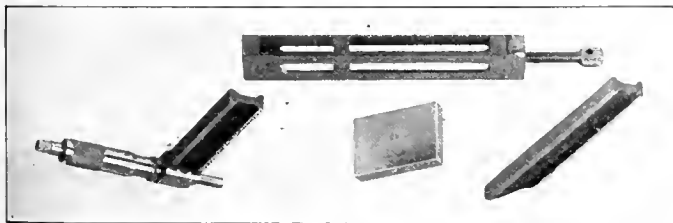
PARTS OF ADJUSTABLE MICROMETER USED IN COMBINATION WITH GAGE BLOCKS OF DIFFERENT SIZES
